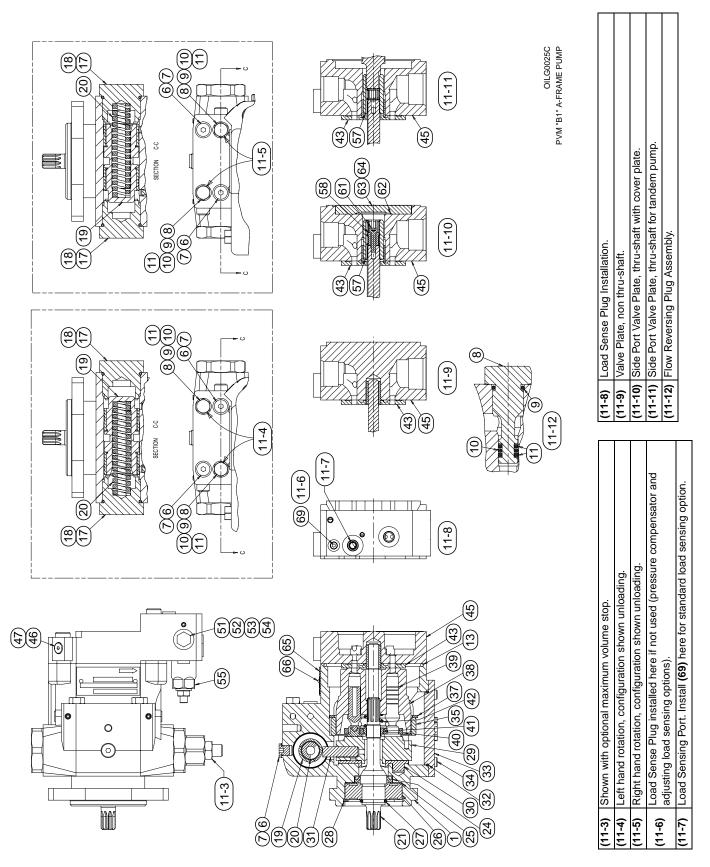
C. Exploded Parts Drawing for PVM-011/-014/-022 A-Frame (519272-104 sheet 4)
